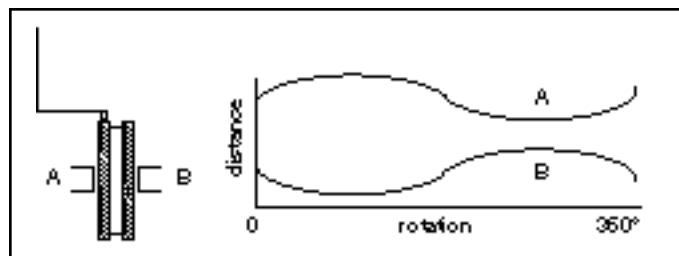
Mounting the probes opposite to one another will output the TIR on both sides of the rotor.
